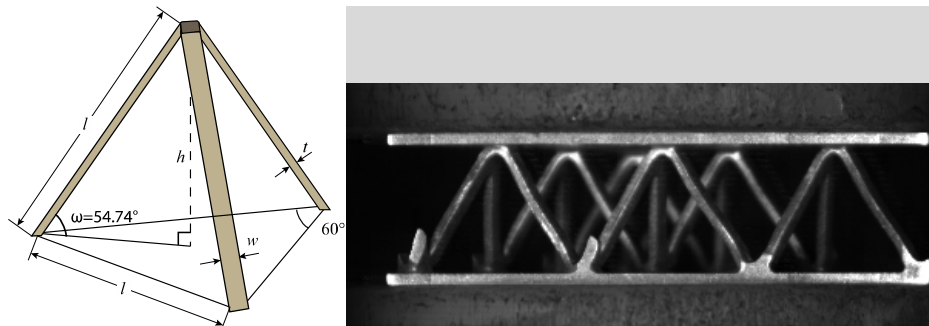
The tetrahedral truss core specimen: basic structure (left) and sandwich (right)
